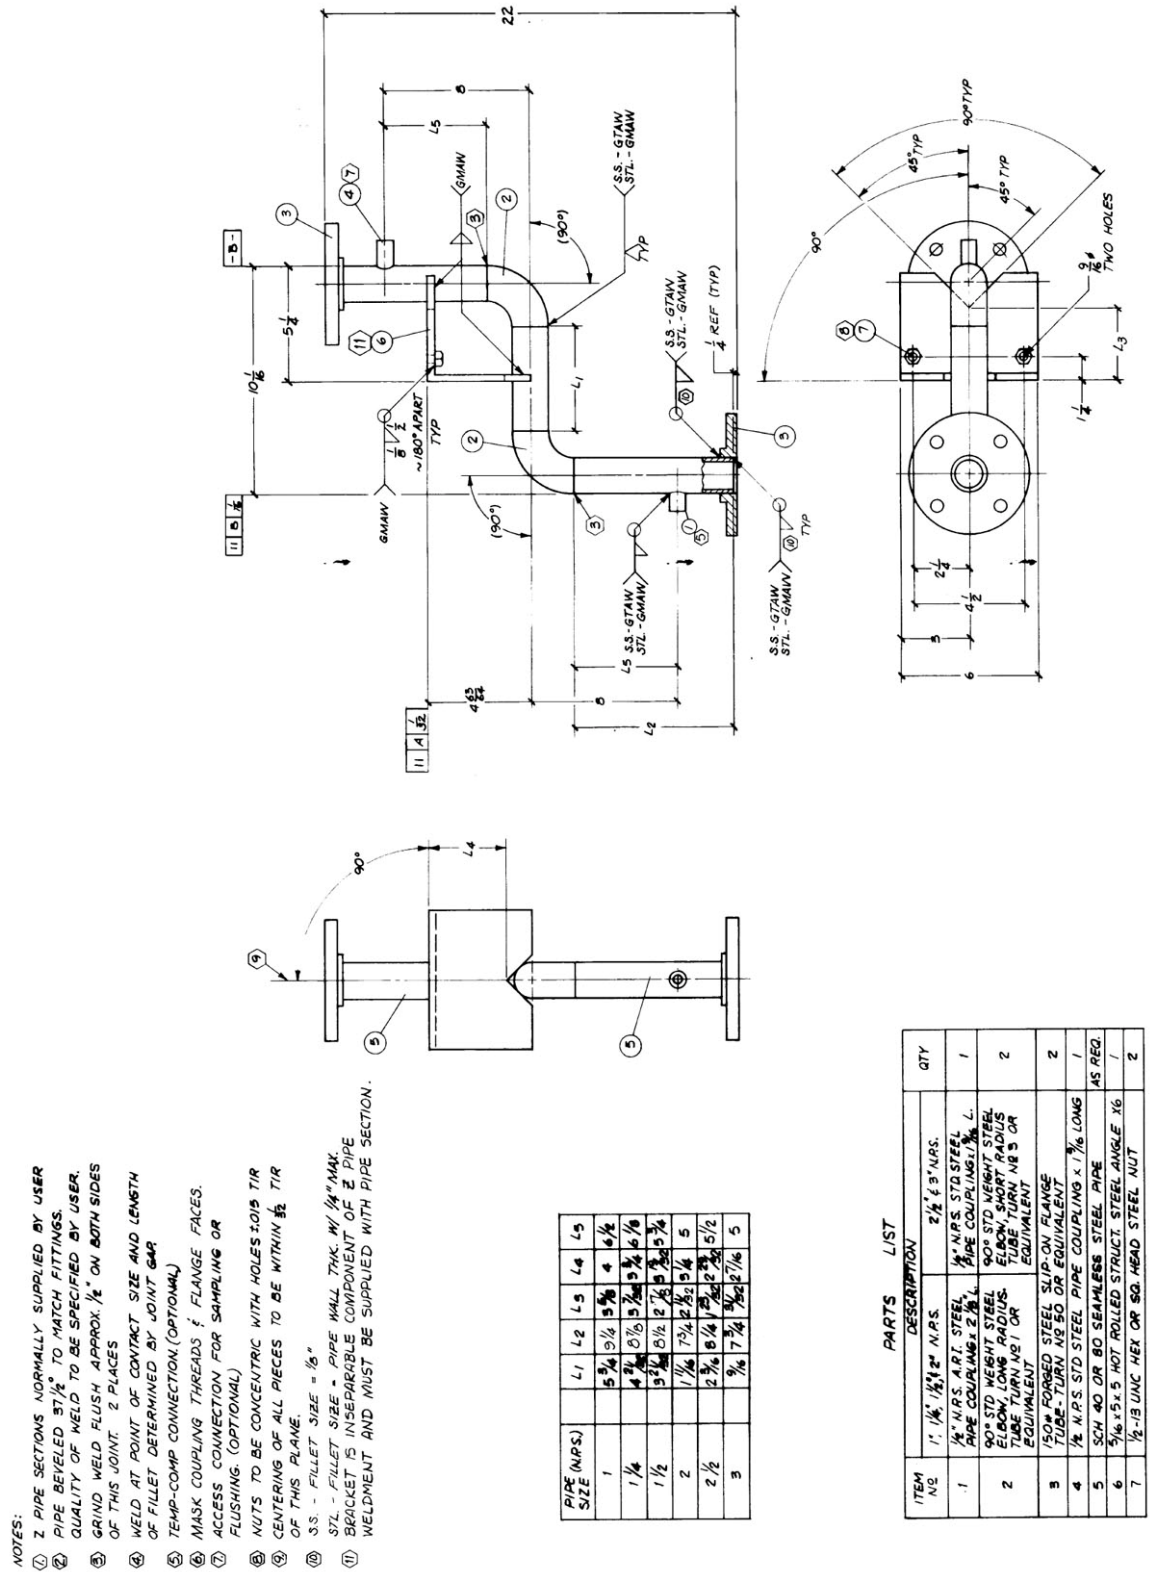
861104: Fabrication details, 1" to 3" Z-pipe section (sheet 1 of 1)
